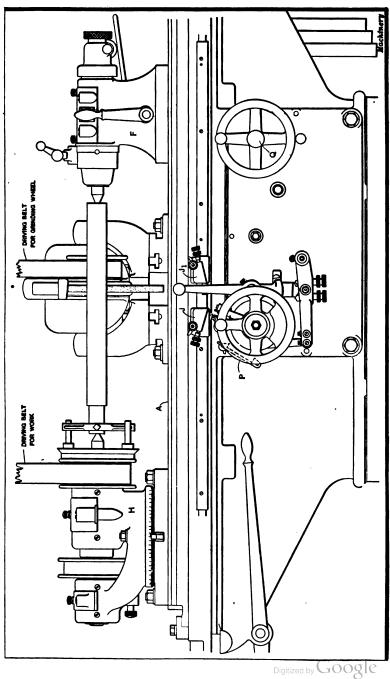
Type of Machine illustrated in Fig. 2, arranged for Grinding a Cylindrical Shaft
